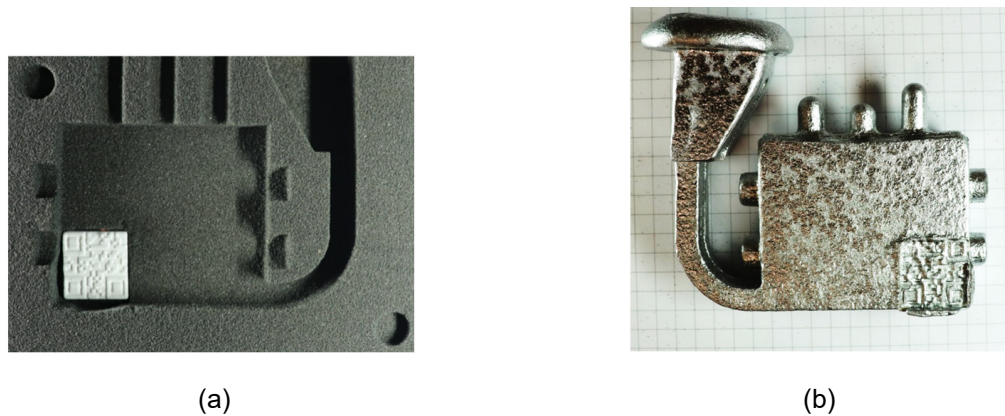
(a) Assembly of the QR tag and the mould. (b) Cast part.
